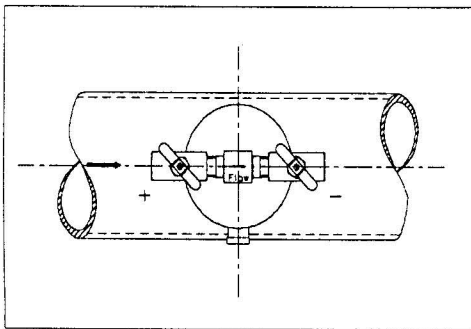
Placement of the differential pressure connecting studs for horizontal pipe arrangement
